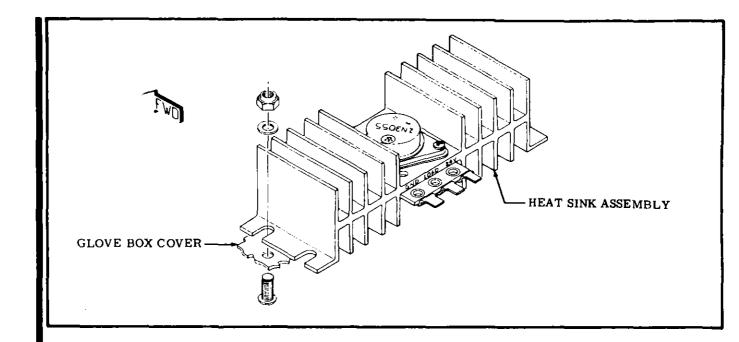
Heat Sink Assembly (Voltage Regulator) Installation
